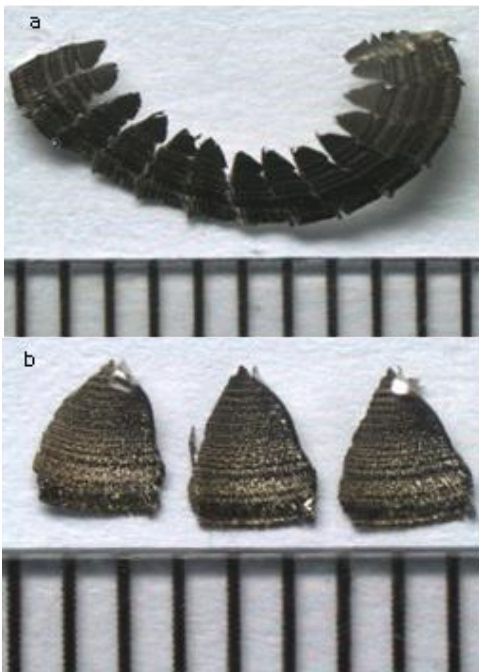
(a) Chip for up-milling (b) Chip for down-milling
